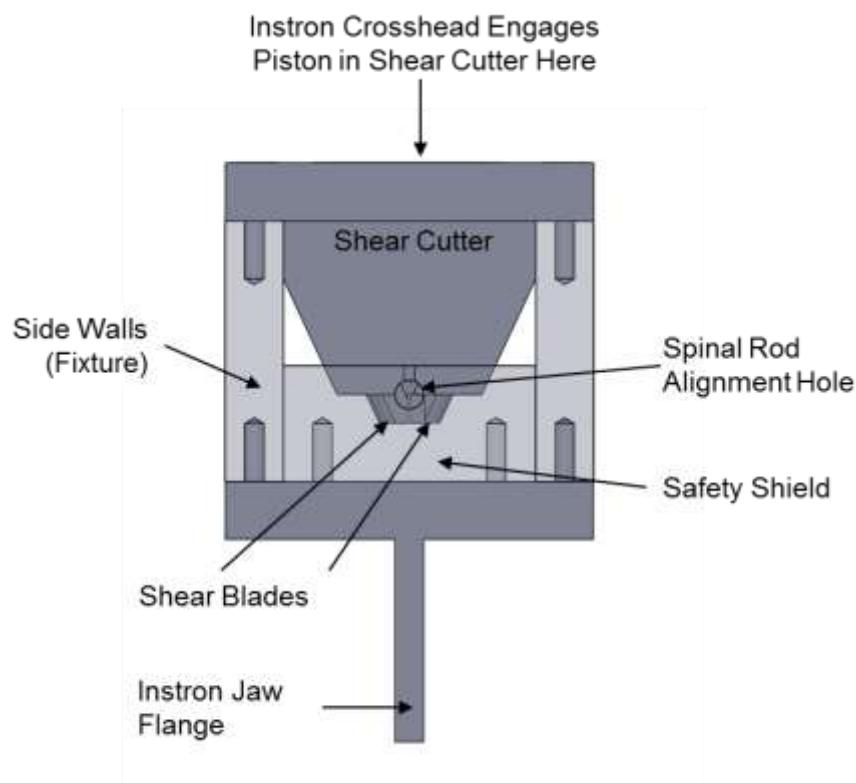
Front view of experimental cutting mechanism mounted in custom Instron fixture
